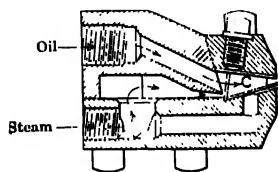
Hammel Oil Burner Head (Steam Atomizer).
